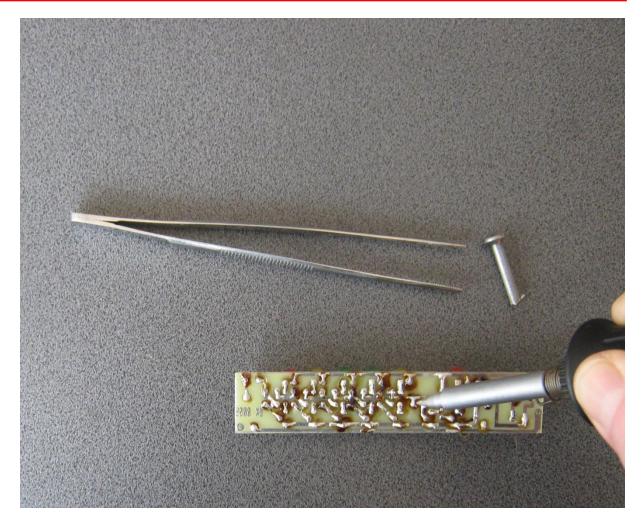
Soldering terminal pads on the PCB of a voltage regulator for car battery
